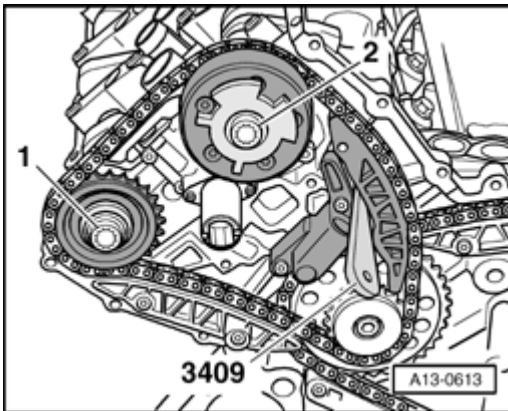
Tightening Camshaft Bolt On Exhaust Camshaft Of Left Cylinder Head To Initial Tightening Torque
